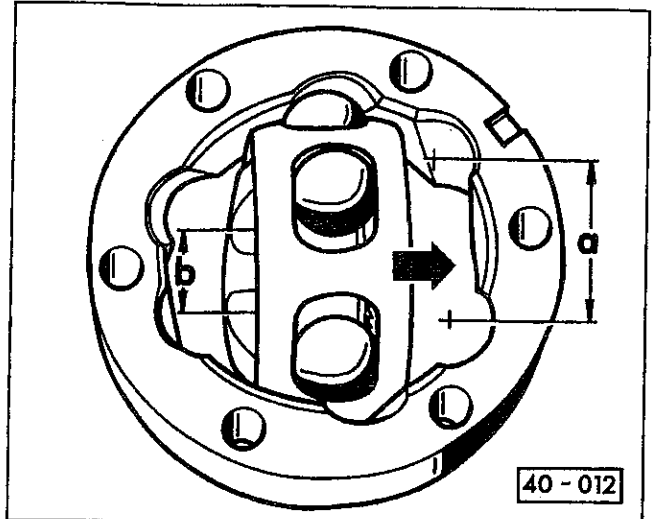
Hub assembly correctly in housing with wide ball groove in housing (a) and a narrow groove in hub (b) together on one side.
